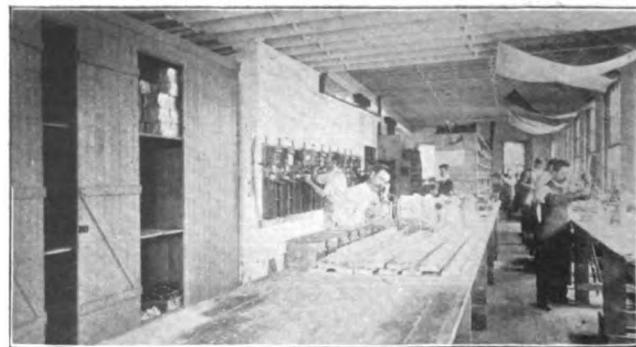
ASSEMBLING AND TESTING DEPARTMENT.
